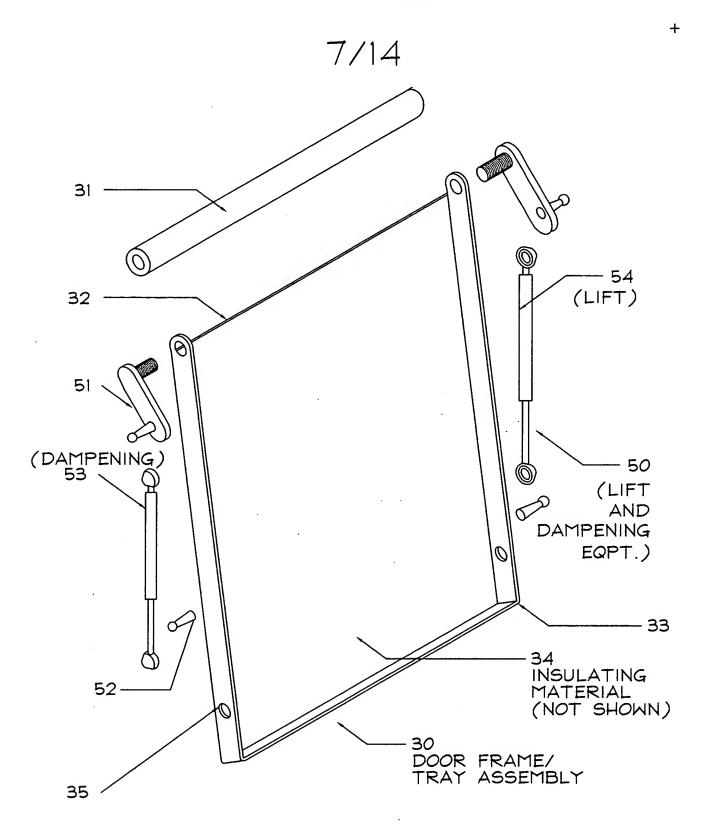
DOOR FRAME/TRAY ASSEMBLY +ASSISTED LIFT & DAMPENING EQPT.
